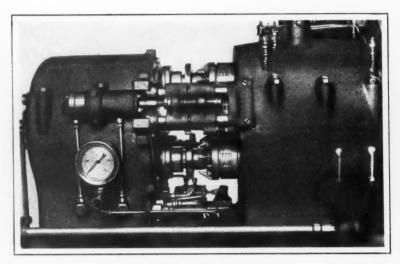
Close-up View of the Hydraulic Chuck-operating Mechanism on the Cleveland Automatic
